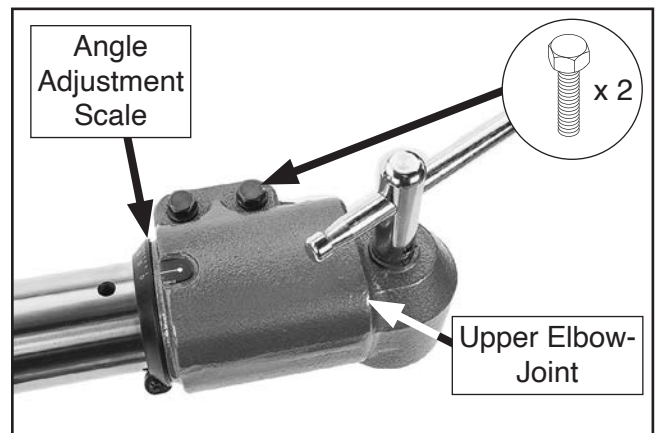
Angle adjustment scale installed onto upper elbow-joint.
